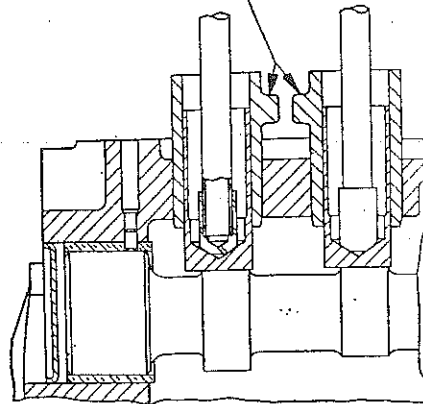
Valve lifter guides on 239, 257 and 286 engines
